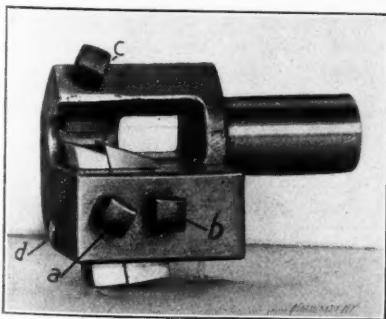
Standard Box-tool made by the Brown & Sharpe Mfg. Co.
